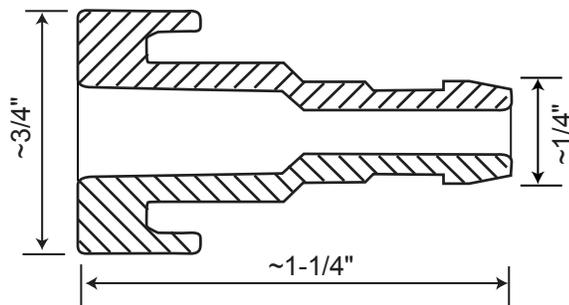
A cross-sectional drawing of the Shogun Electric Match Connector giving approximate overall dimensions.
